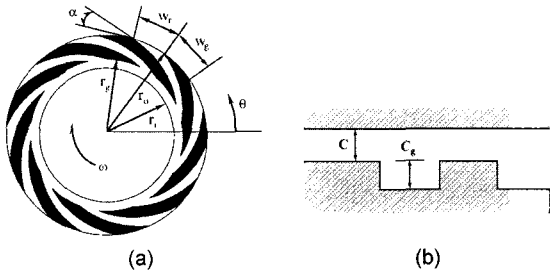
Geometry and design parameters of a spiral groove face seal.
